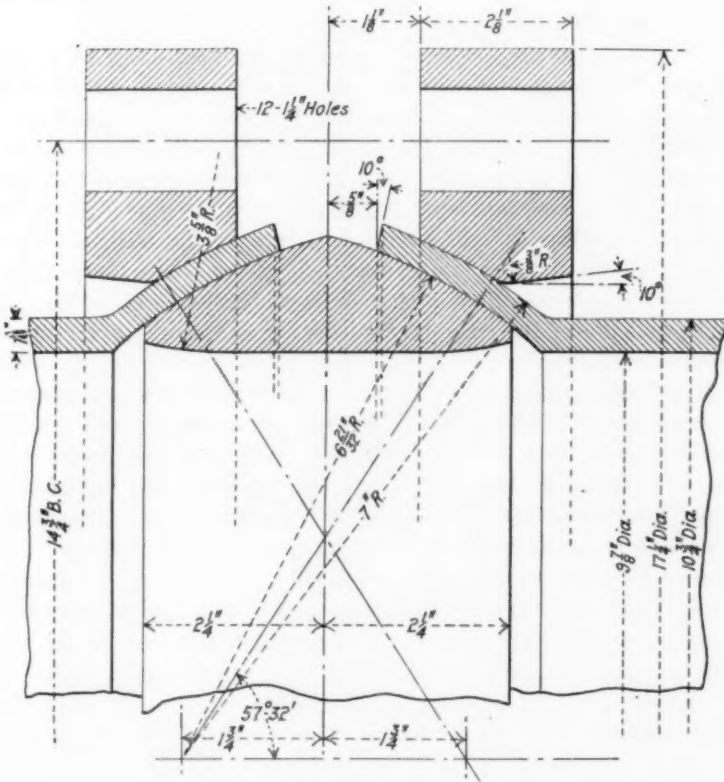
DETAIL OF 10-IN. PIPE JOINT
